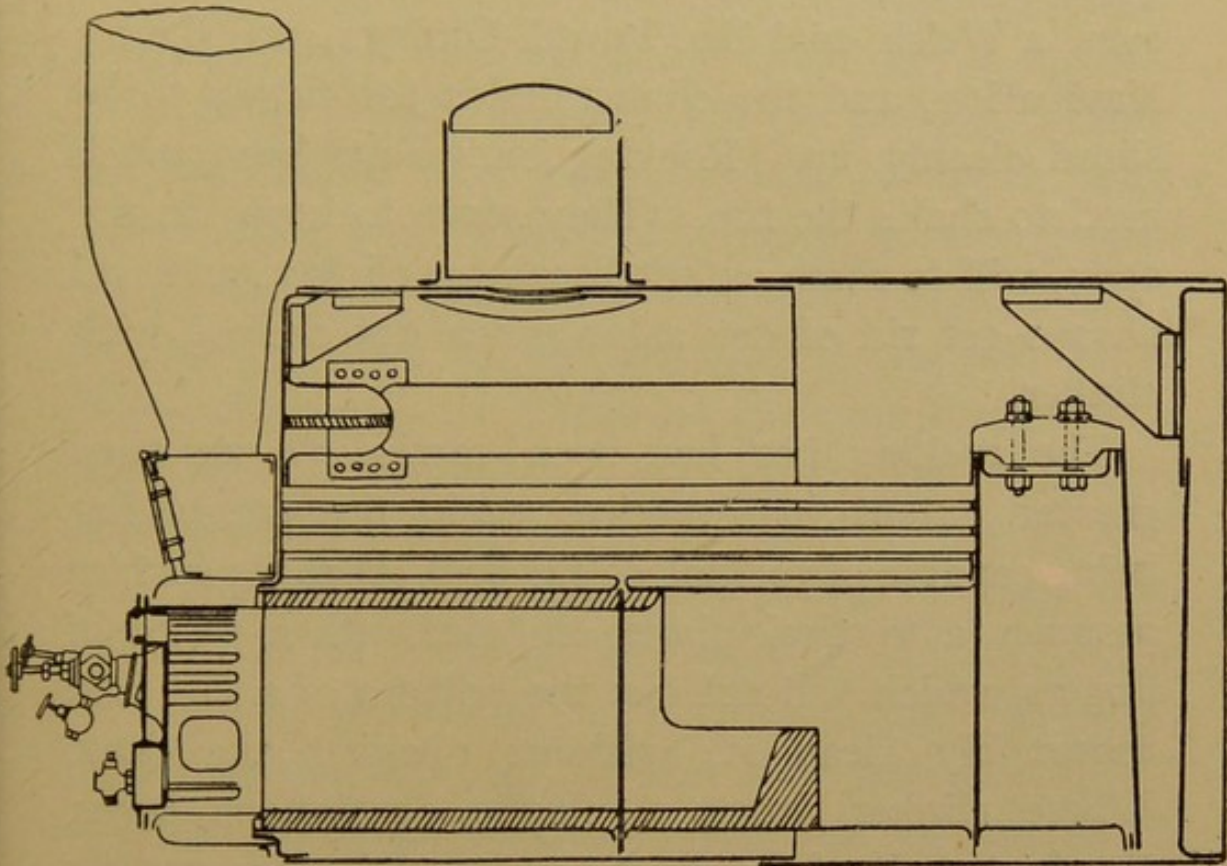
LIQUID FUEL FIRED FRENCH TORPEDO BOAT BOILER.
